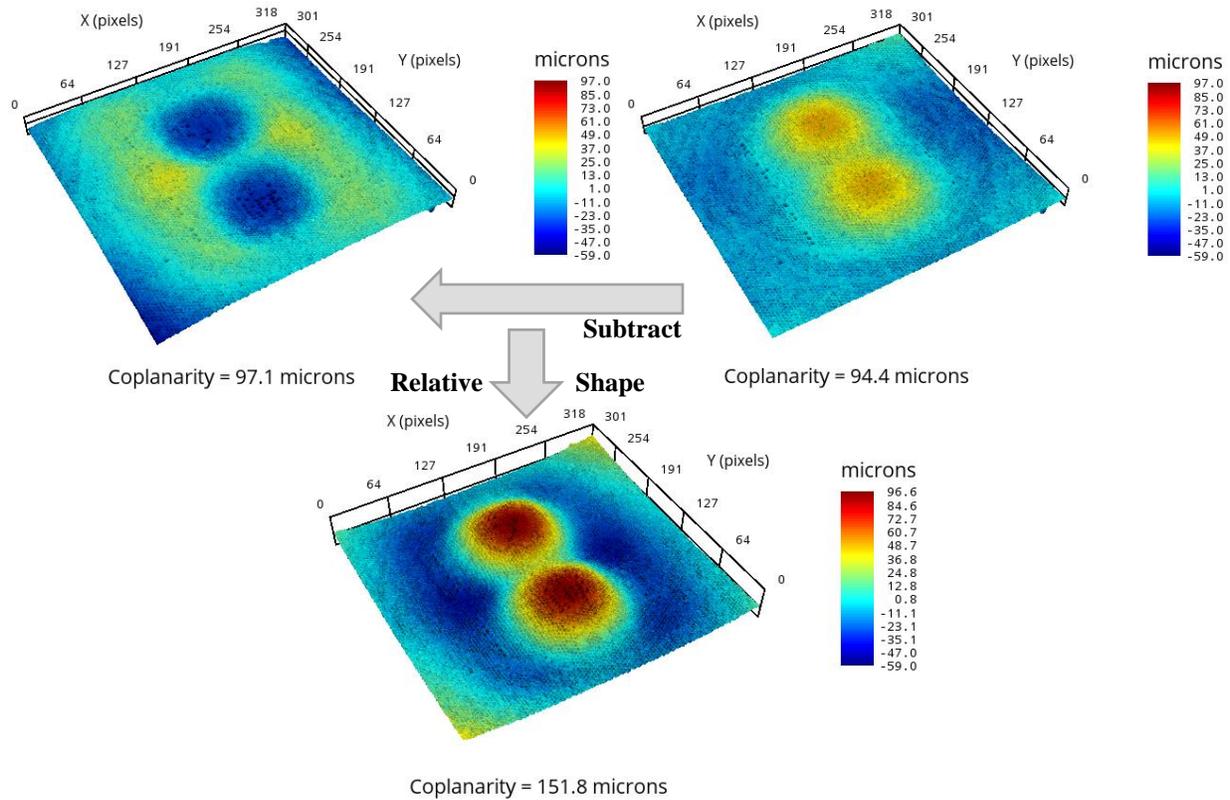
Solder Liquidus (220°C) Interface Analysis between Larger BGA 4 and PCB 1 – ROI 2
